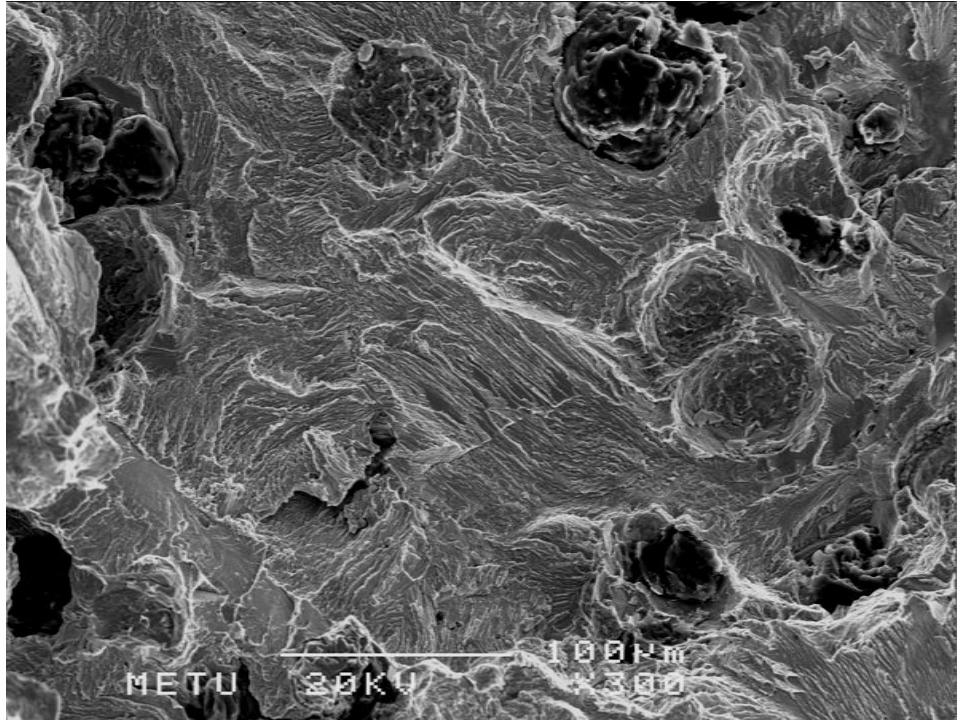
Pearlitic structure on the fracture surface of specimen PWHT700-3
